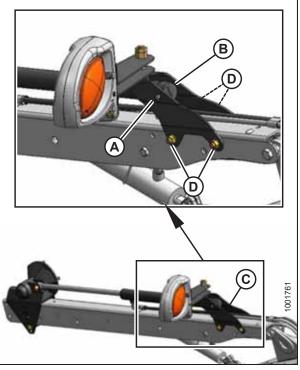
Left Reel Arm Cylinder in Forward Position
